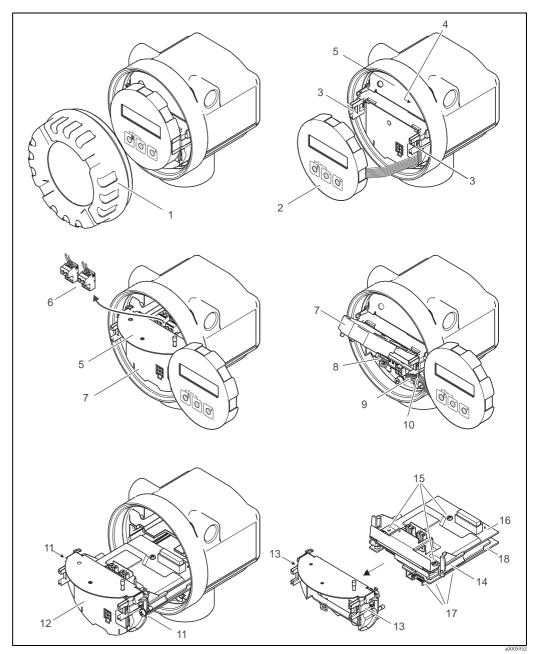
Installing and removing electronics boards, non-Ex/Ex-i version
